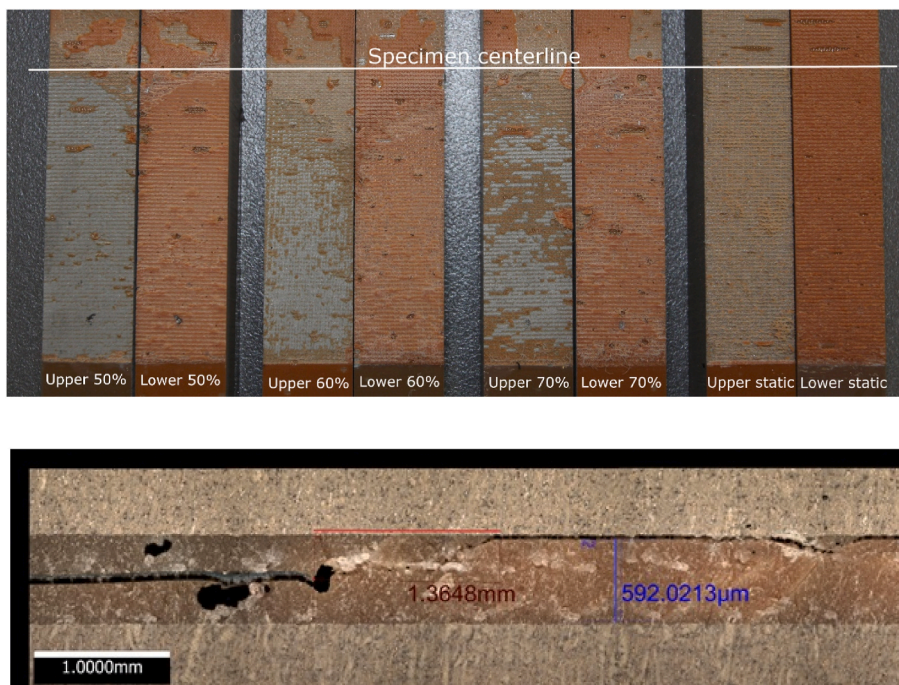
(Above) The fracture surfaces of the fatigue-tested specimens (load levels of 50%, 60%, 70%) and a quasi-static tested ENF specimen. (Below) An optical image is taken from a cross-section of a tested specimen (50%). The red bar presents the approximate distance (1.365 mm) from the pre-crack tip to the stable crack path point near the upper adherend. The blue line presents the thickness of the adhesive layer (0.592 mm).
